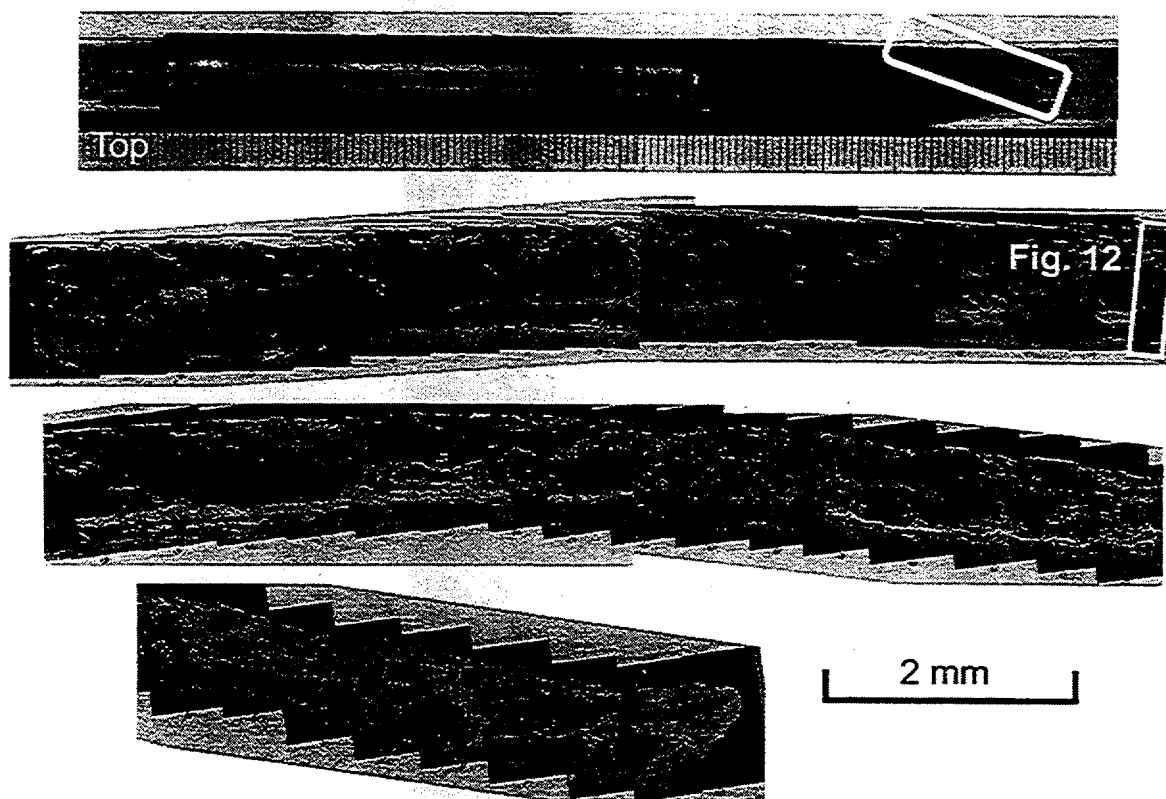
Fracture surface of failed cladding of FK-6.
